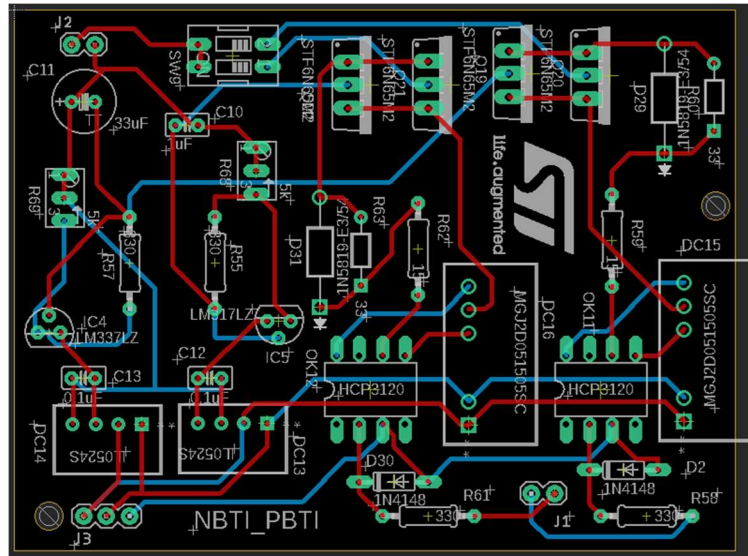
Picture of the NBTI/PBTI Board drawn in Eagle PCB Design
